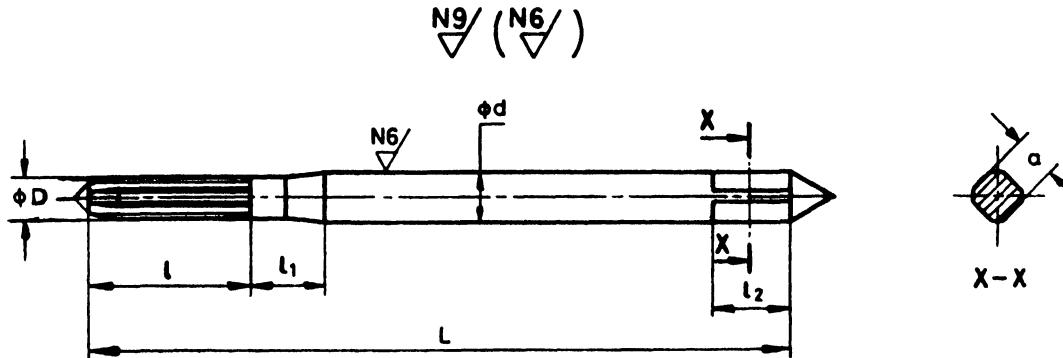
DIMENSIONS FOR MACHINE SCREW TAPS
